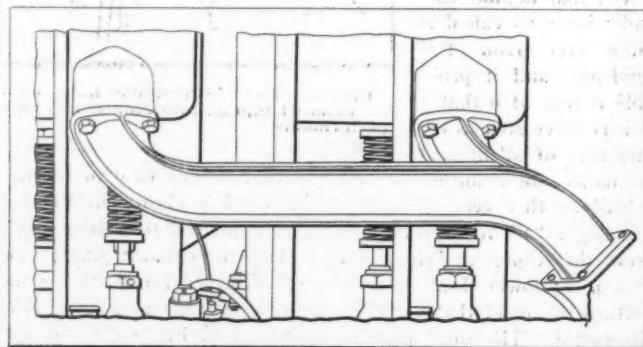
Depicting a manifold in which the holding bolts are get-able, and of good practical size
